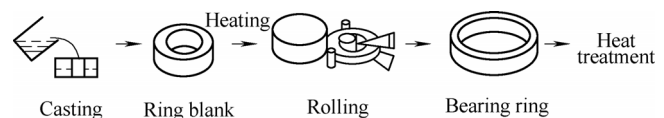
Casting-rolling compound forming(CRCF) process for producing ring parts
